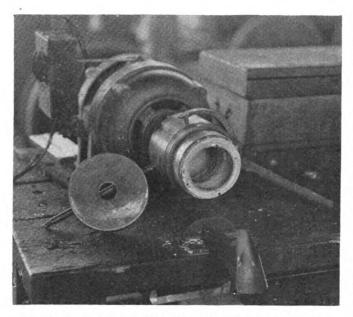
Fixture for centrifugal casting of connecting-rod bearings
